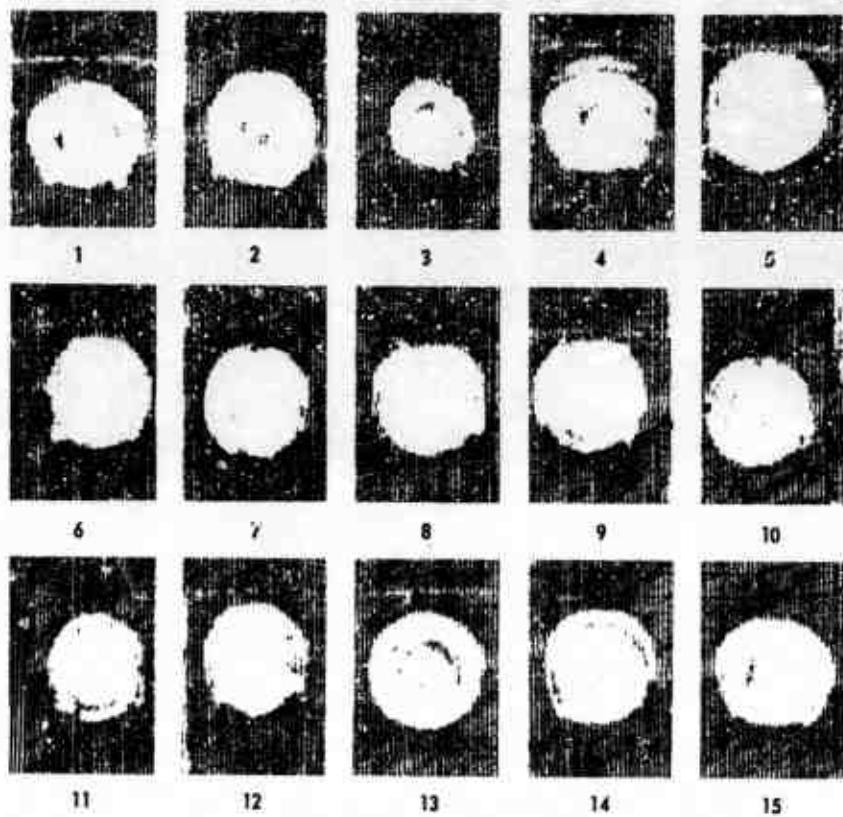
C-Scan Record of Series 2 Welds.
